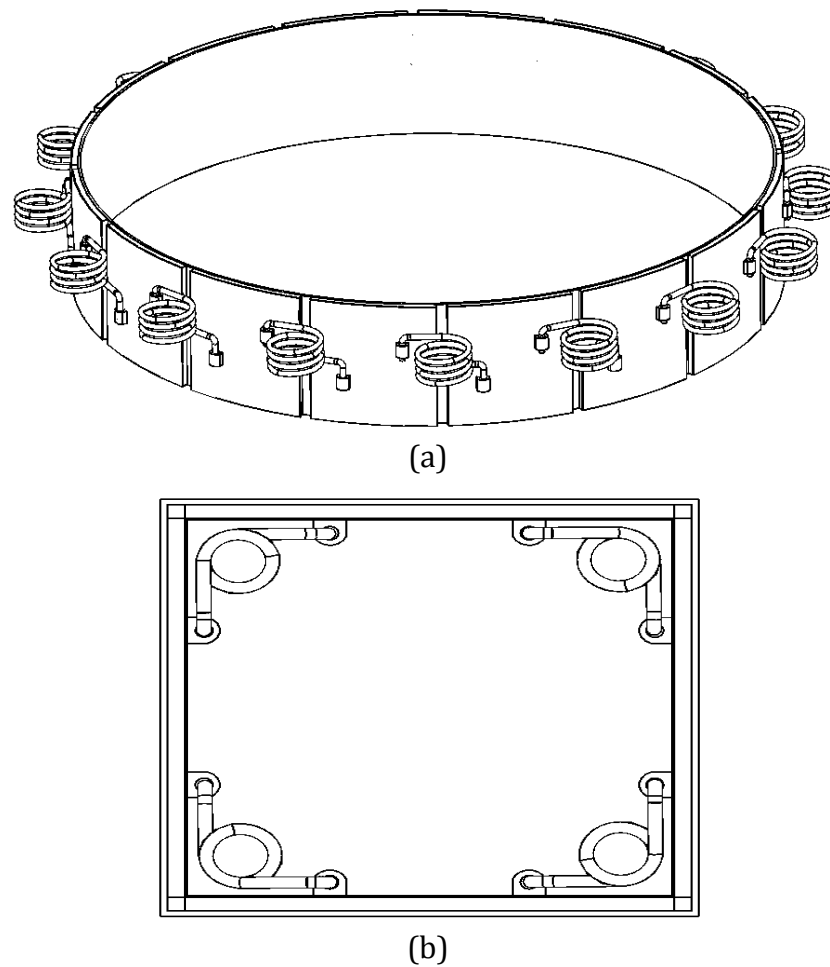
Configuration of torsion spring fixture for external mounting on casings (a) and for prismatic parts (b) – shown without connecting link
